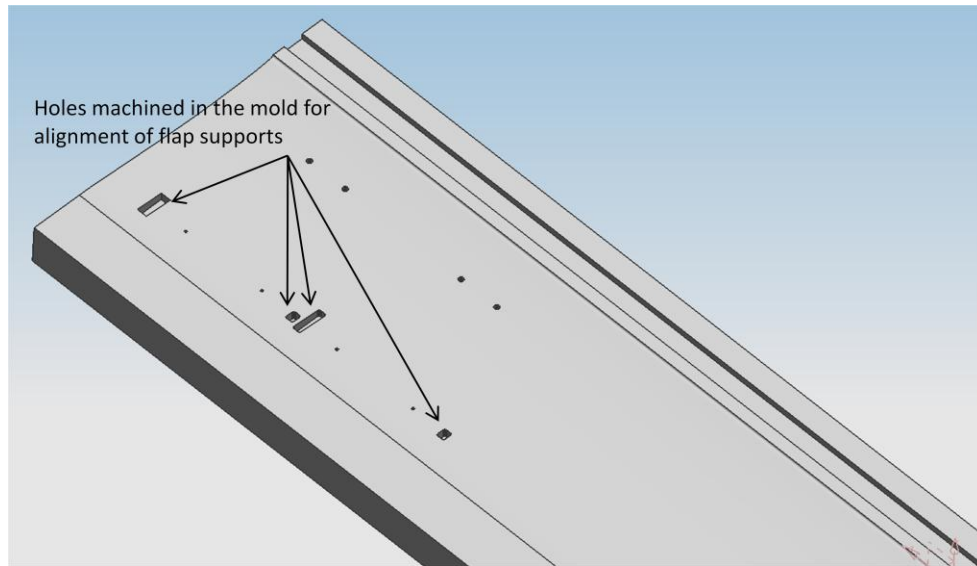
Holes machined in the bottom mold for alignment of flaps during the cure
